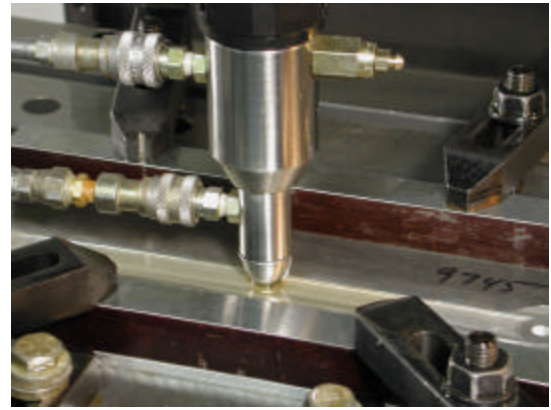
Photo of friction stir welded plate being low plasticity burnished with single ball tool.
